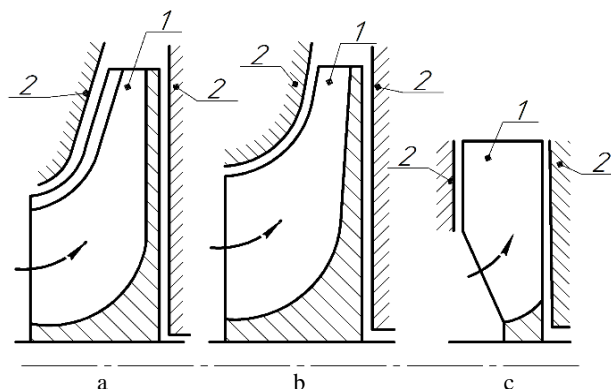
Schematic representation of the flowing part with impellers of different types: a – closed impeller; b – semi-opened impeller; c – opened impeller; 1 – blade; 2 – housing of the pump
